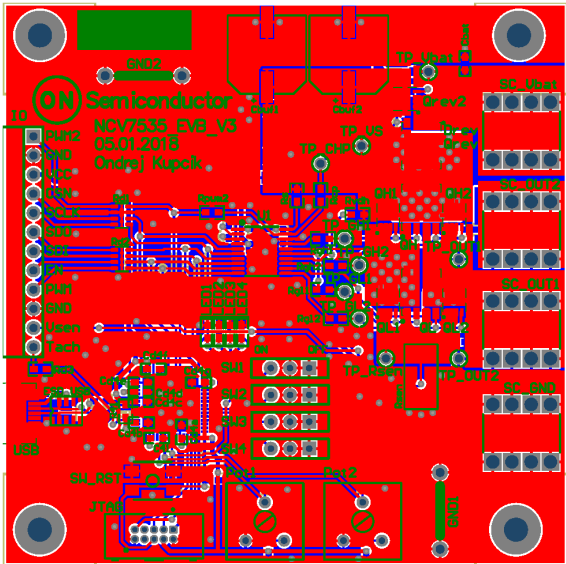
NCV7535 EVB PCB Top Composite Drawing
